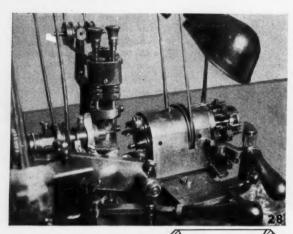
The collet is turned, faced, countersunk, sawed, and drilled in this machine. Fig. 29—Cross-section drawing of jewel and setting assembly. Fig. 30—This machine faces and bevels the jewel settings.
